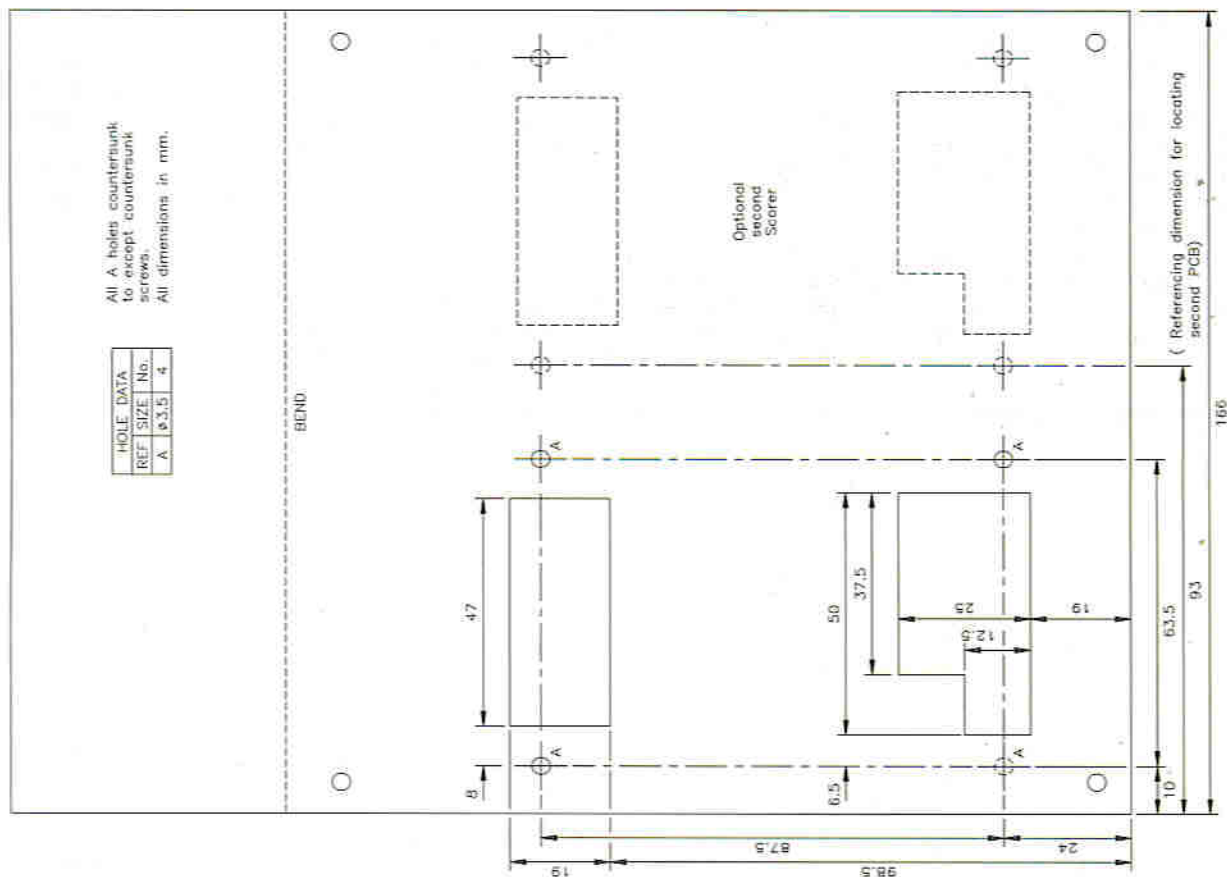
Box drilling details, with dimensions for locating the optional second PCB, if required.
